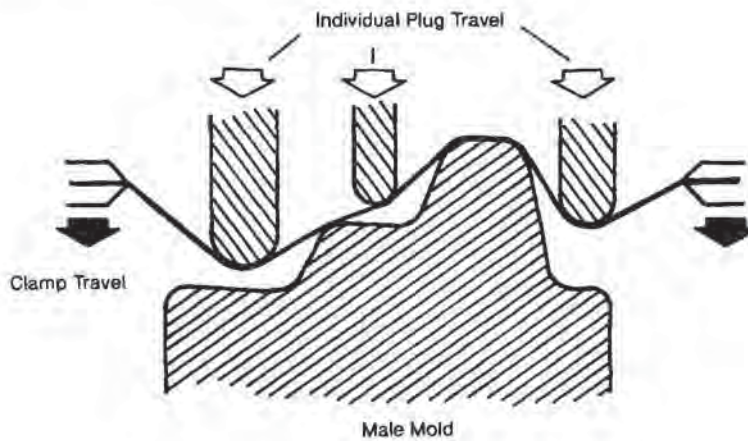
Plug-assisted drape forming, using a wire frame plug
